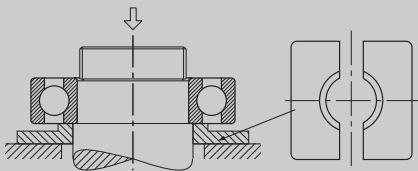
Dismounting of Inner Ring by using Hydraulic Press
